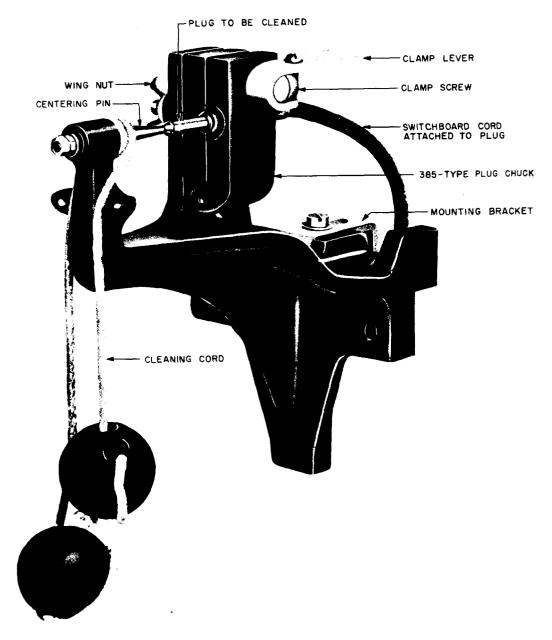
384A Portable Plug Cleaner With Plug Mounted in 385-Type Chuck Before Being Clamped
